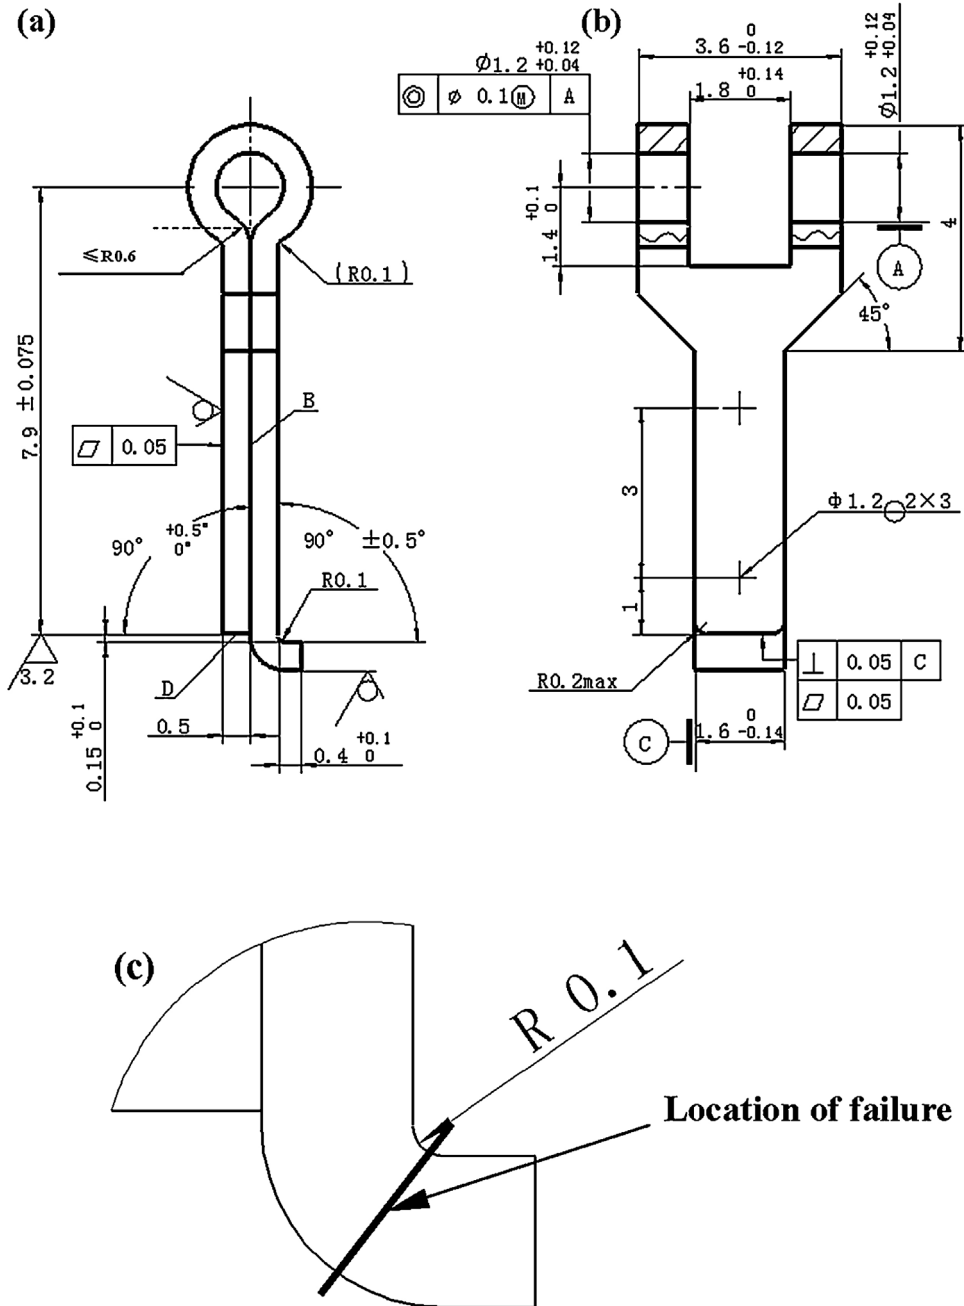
Planar geometrical graphs of 4Cr13 linkage. (a) Side view, (b) front view and (c) location of failure.
